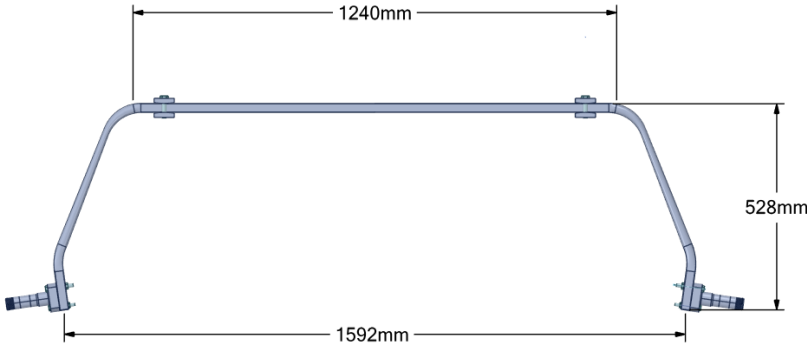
Aluminium 7075 T6 Landing Gear Drop Test Dimension
